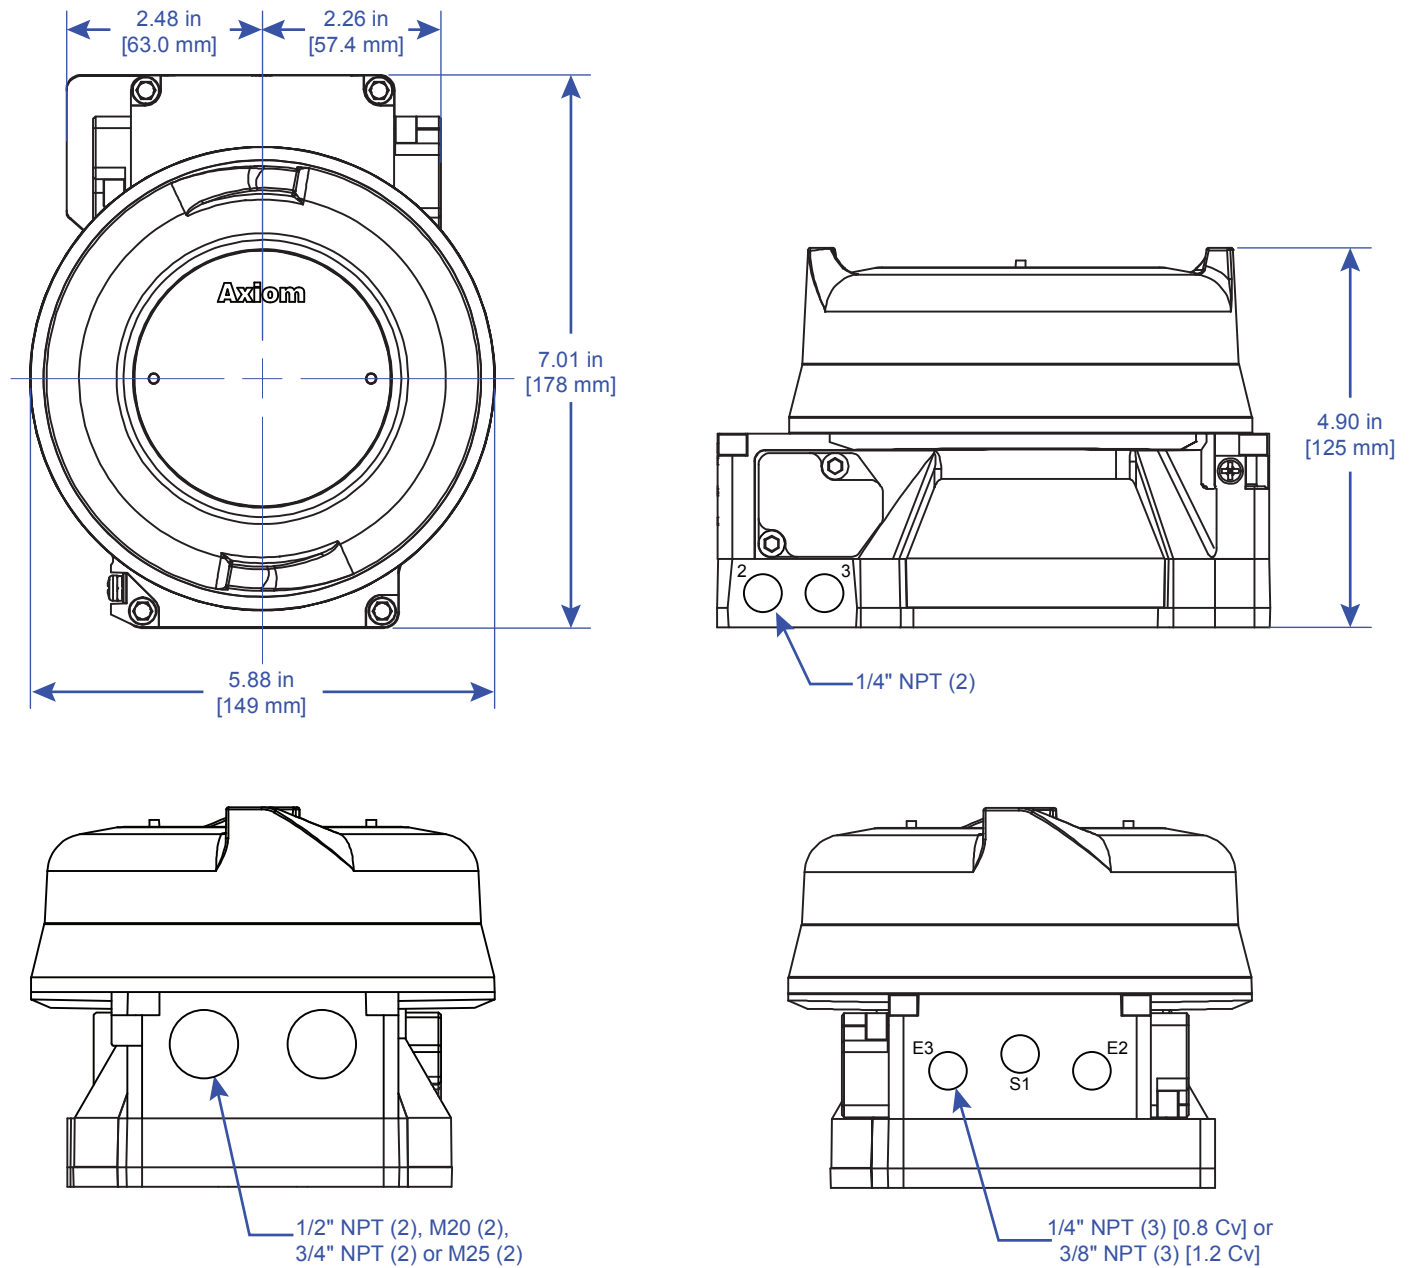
Axiom dual coil shuttle piston pneumatic valve
